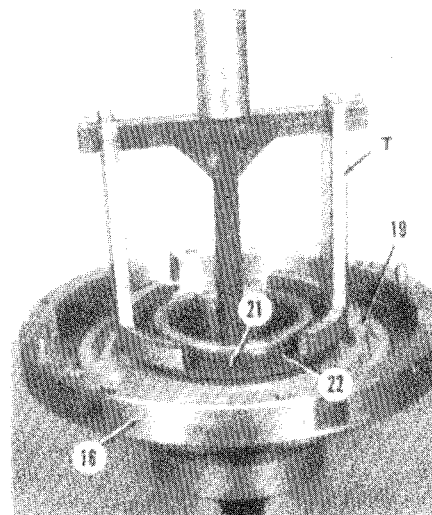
Use suitable horseshoe shaped tool (T) to compress Belleville washers (21) in order to remove and install snap ring (22).
